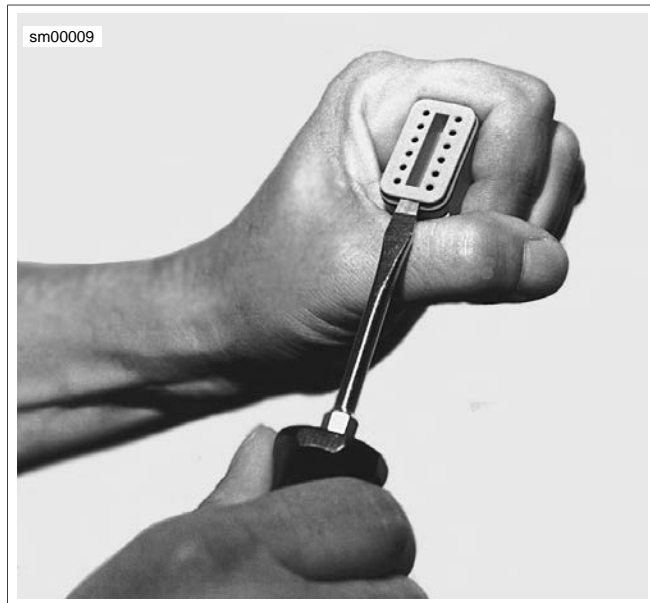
Deutsch Connector: Remove Secondary Locking Wedge
